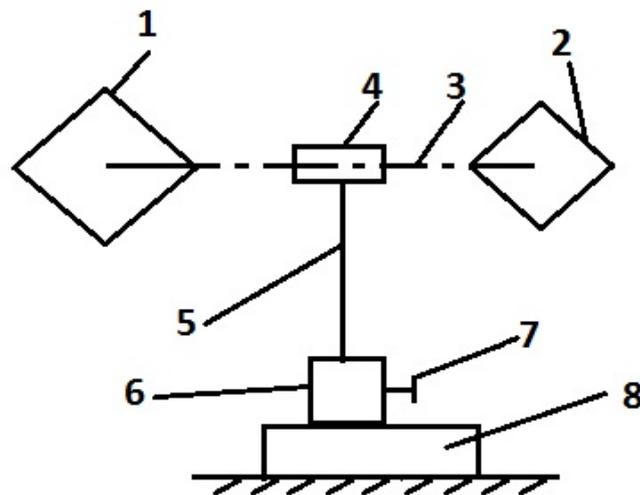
Example how to realize the pull for the chain without any contact with it: 1 and 2 – sprockets; 3 – chain (for example, bush-roller); 4 – magnet; 5 – vertical support; 6 – block; 7 – keeper screw; 8 – basis
